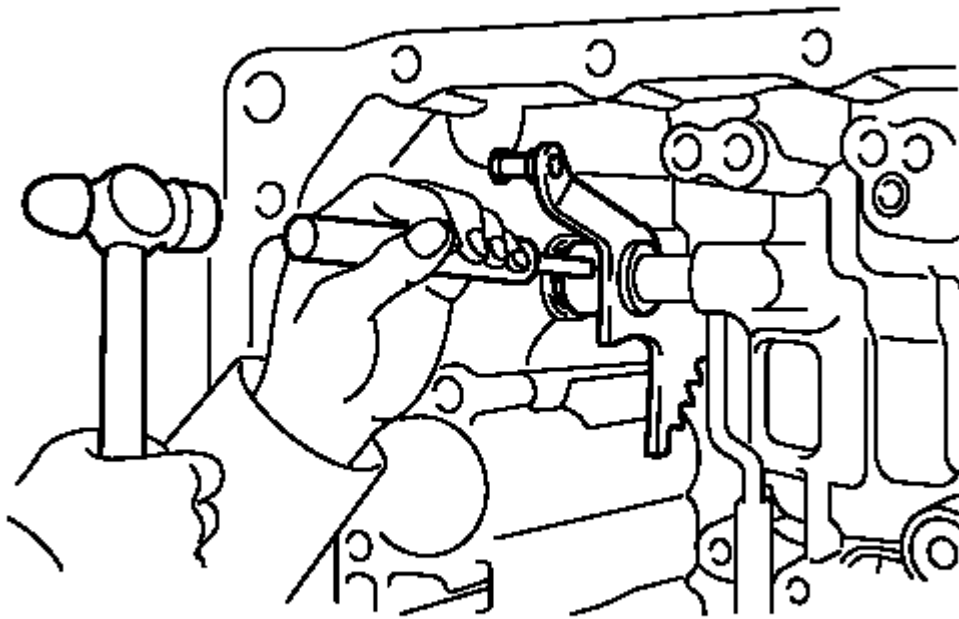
Using A Pin Punch And Hammer, Driving Out Pin
